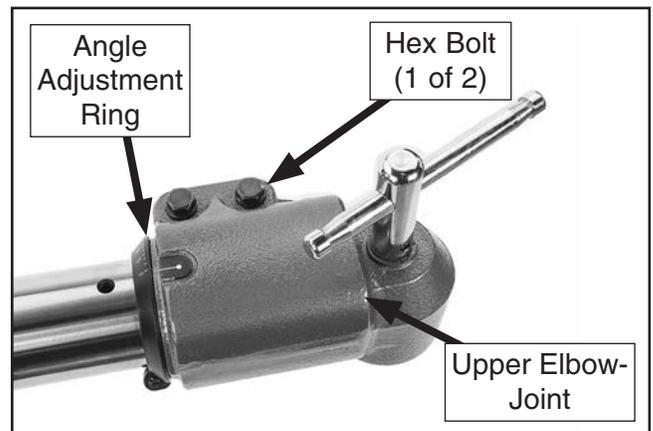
Angle adjustment ring installed onto upper elbow-joint.
